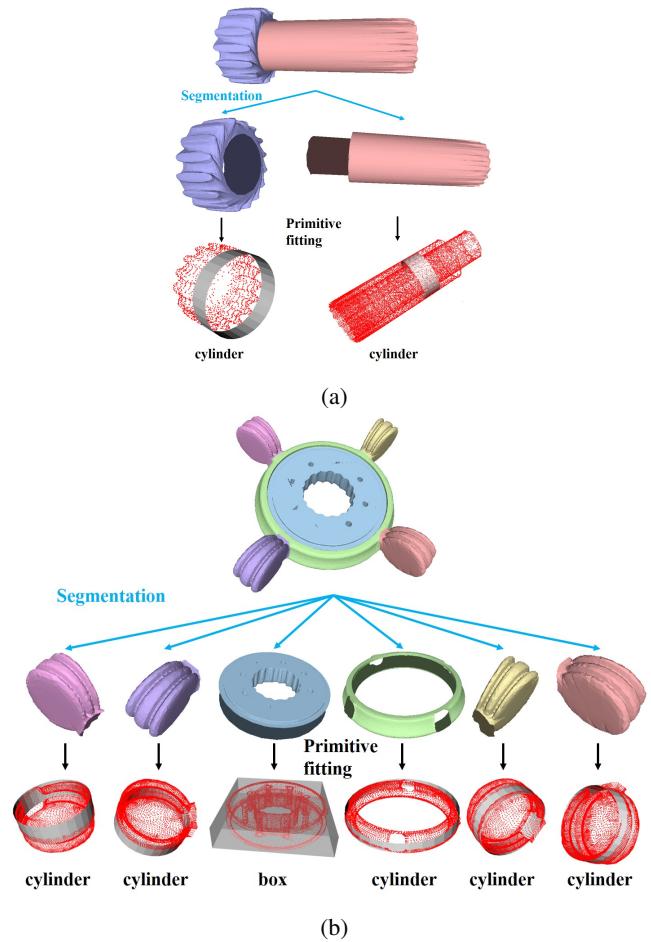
Two examples of fitting the segmented parts with shape primitives. (a) The inner sleeve shaft is segmented into two parts, both of the two parts are fitted appropriately by cylinders. (b) Five segments of the rotor are more closely fitted by cylinders and the other one is fitted its bounding box, notice that the third segment looks cylindrical but it is empty on the cylindrical surface.
